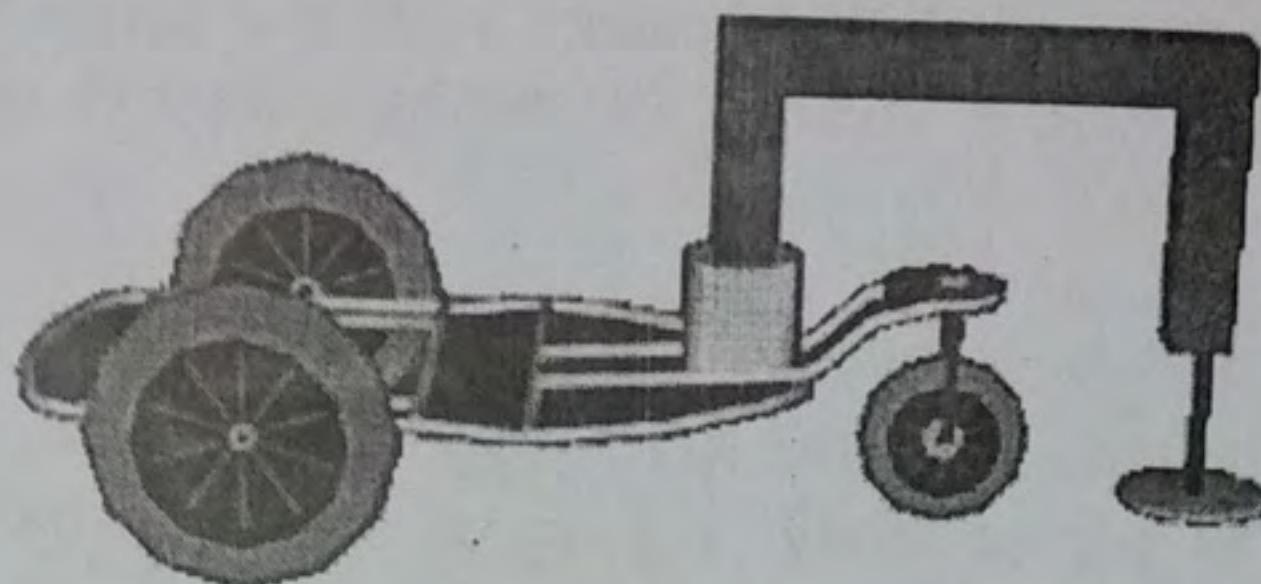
General layout of the mechanical construction of the ROV prototype.
